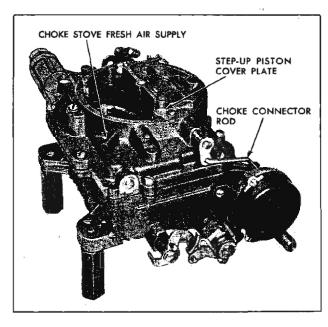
B-23 Carter AFB Four Barrel Carburetor
